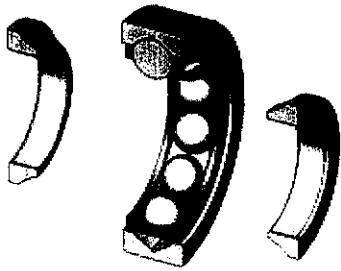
CUT SECTION VIEW OF BEARING
